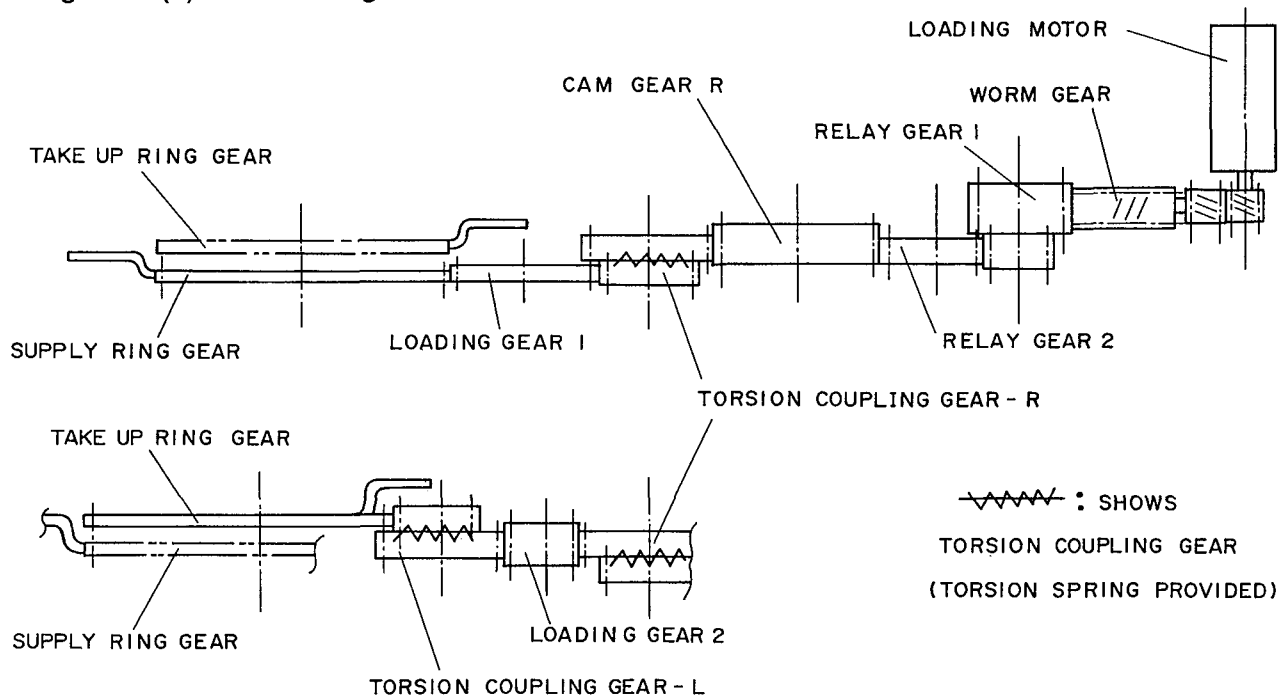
Loading Mechanism of TH Chassis (Side View)
